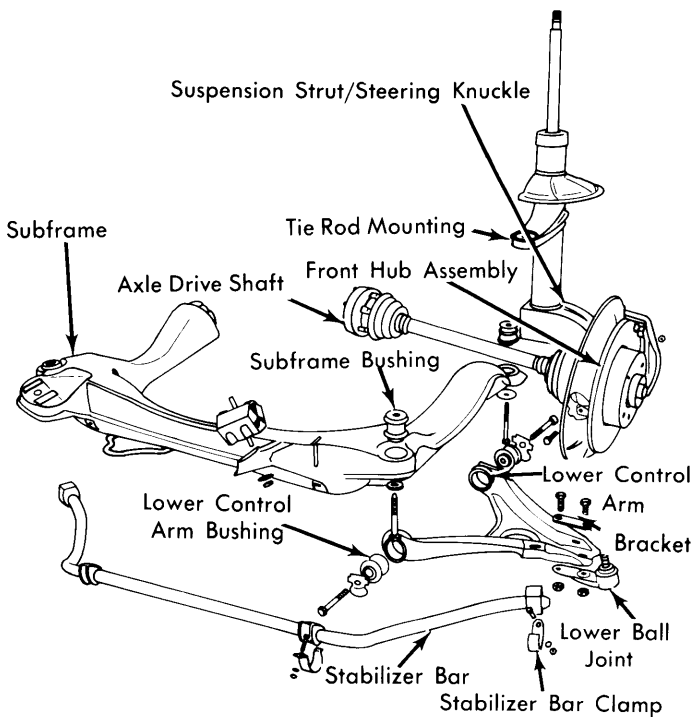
Exploded View of Audi Fox Front Suspension Components
